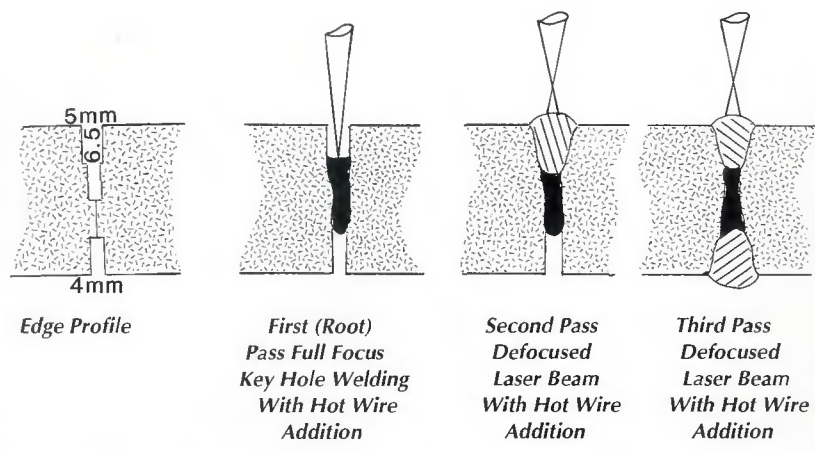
Concept of sequencing multipass laser beam welding experiments incorporating a hot welding wire addition.
